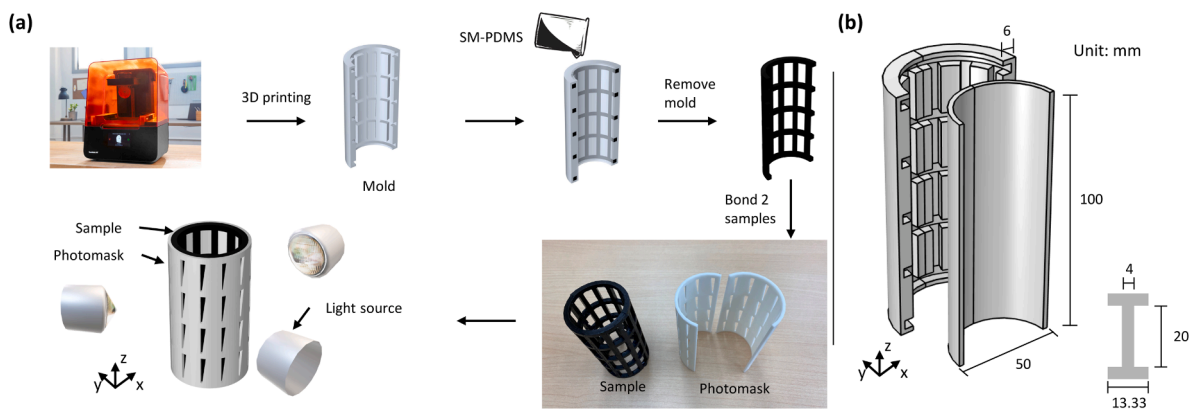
Reprogramming a 3D chiral metamaterial made of SM-PDMS. (a) Process of preparing a 3D chiral metamaterial using 3D printing to make a mold, and the illustration of applying local light stimulation. (b) Mold design of a prepared 3D auxetic metamaterial.
